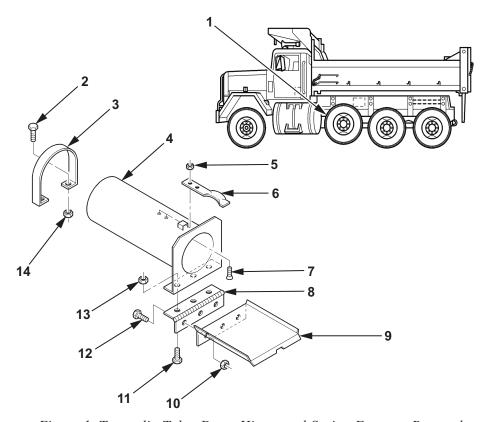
Tarpaulin Tube, Door, Hinge, and Spring Fastener Removal.
